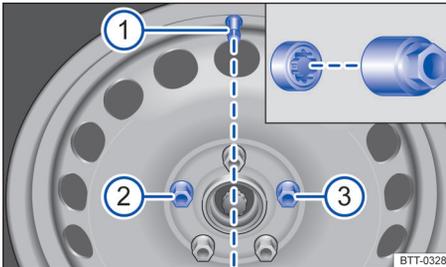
Changing a wheel: Tire valve ① and installation points for the anti-theft wheel bolt (if equipped) ② or ③.
